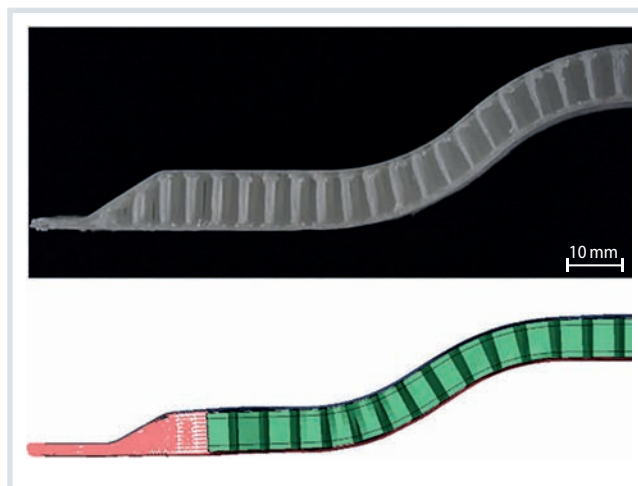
Component demonstrators : 3D molded sandwich structure with injection-molded component edge, sawed component (top) and variation of the face sheet material (black components).
